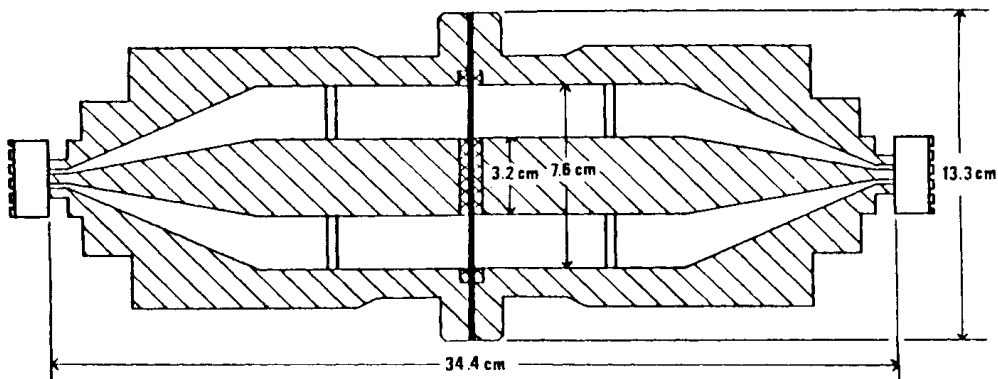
Cross section of a flanged coaxial transmission line holder [17].
